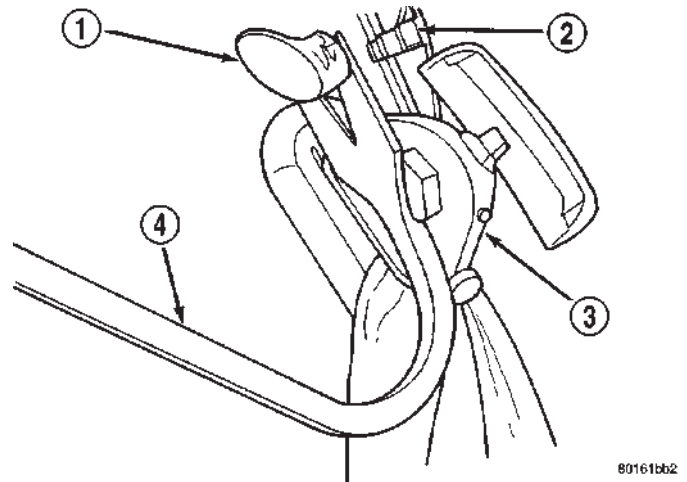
Turning Loop Height Adjuster Knob Removal - Typical
